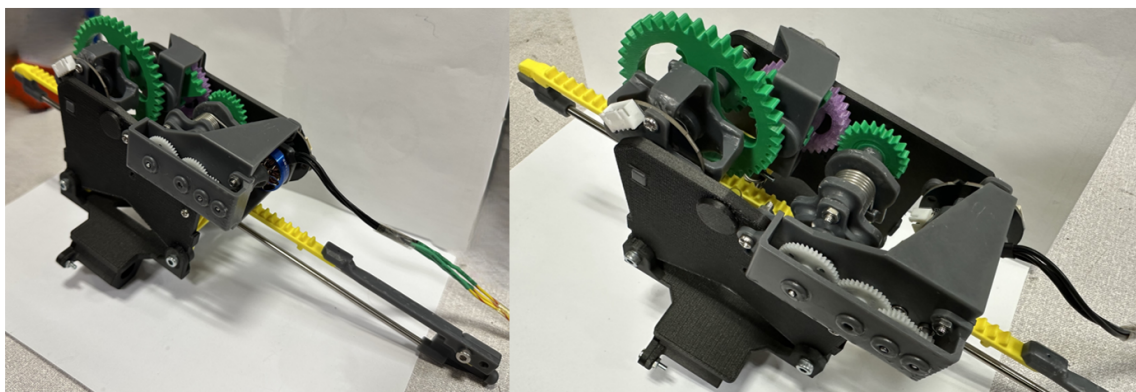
The manufactured Ver.3 of the jumper prototype. The picture on the left is an overview and the right one is a more zoomed in view of the jumper from the top.
